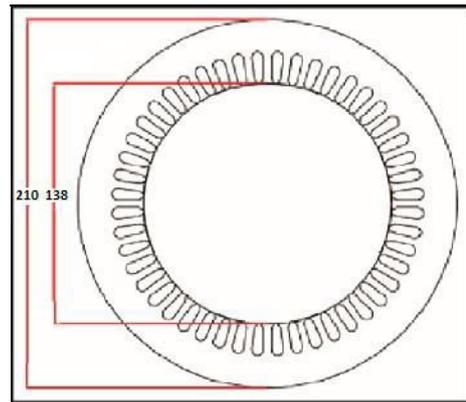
Schematic of the stator core (dimensions in millimeters).
